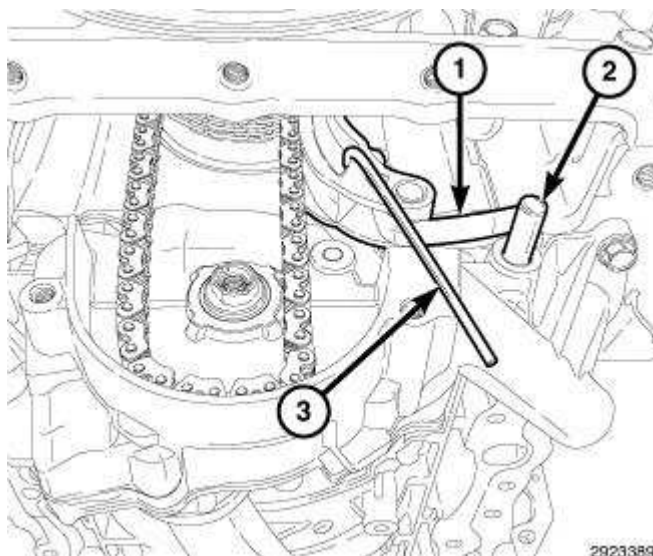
Retaining Pin, Oil Pump Chain Tensioner Spring & Dowel Pin
